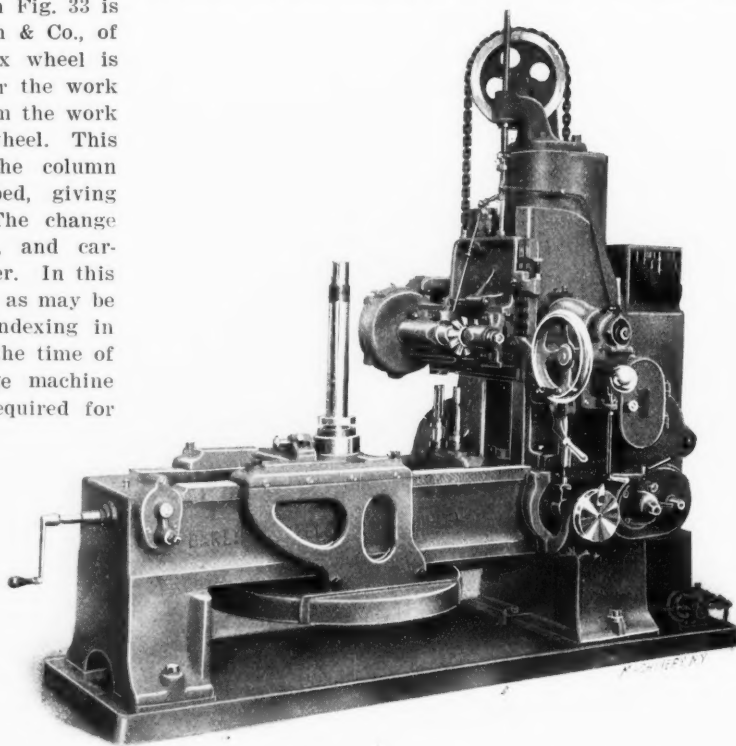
The Darling & Sellers 4-foot Automatic Spur Gear Cutting Machine.
